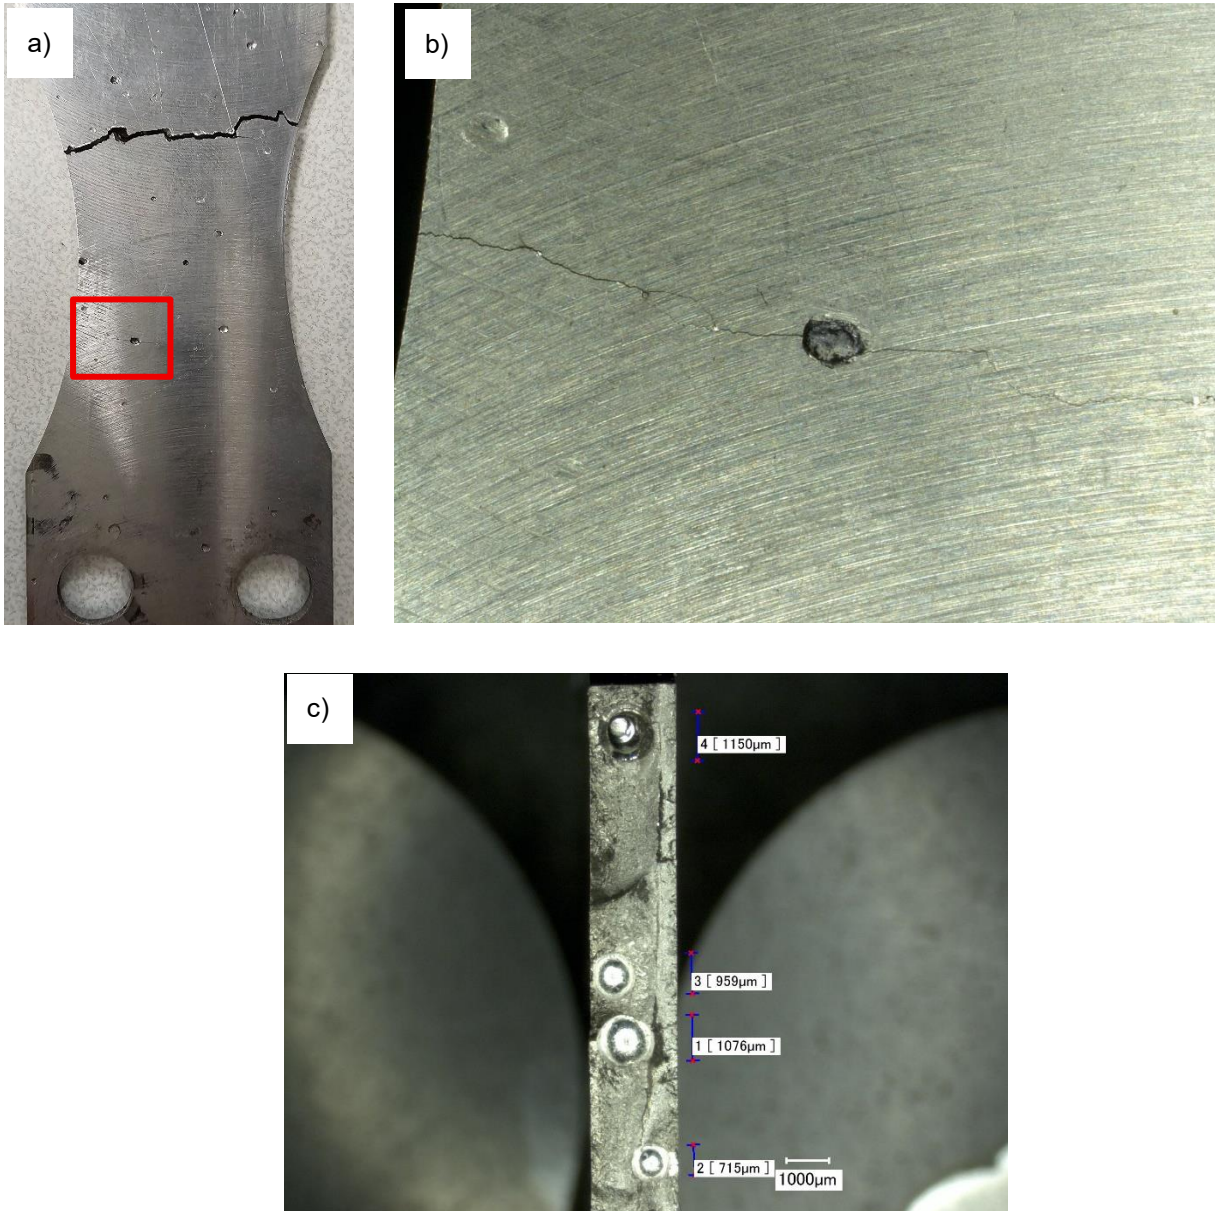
(a) Specimen fractured during a bending fatigue test, (b) Magnified view of the area enclosed by the rectangle in Fig. 5a, and (c) Fracture surface of the WAAM SDSS P.
